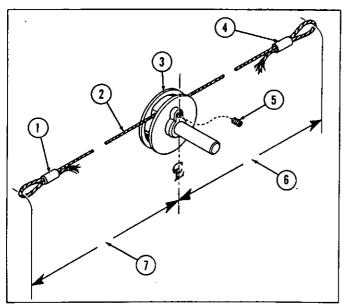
TURNTABLE CABLE AND DRIVE PULLEY
